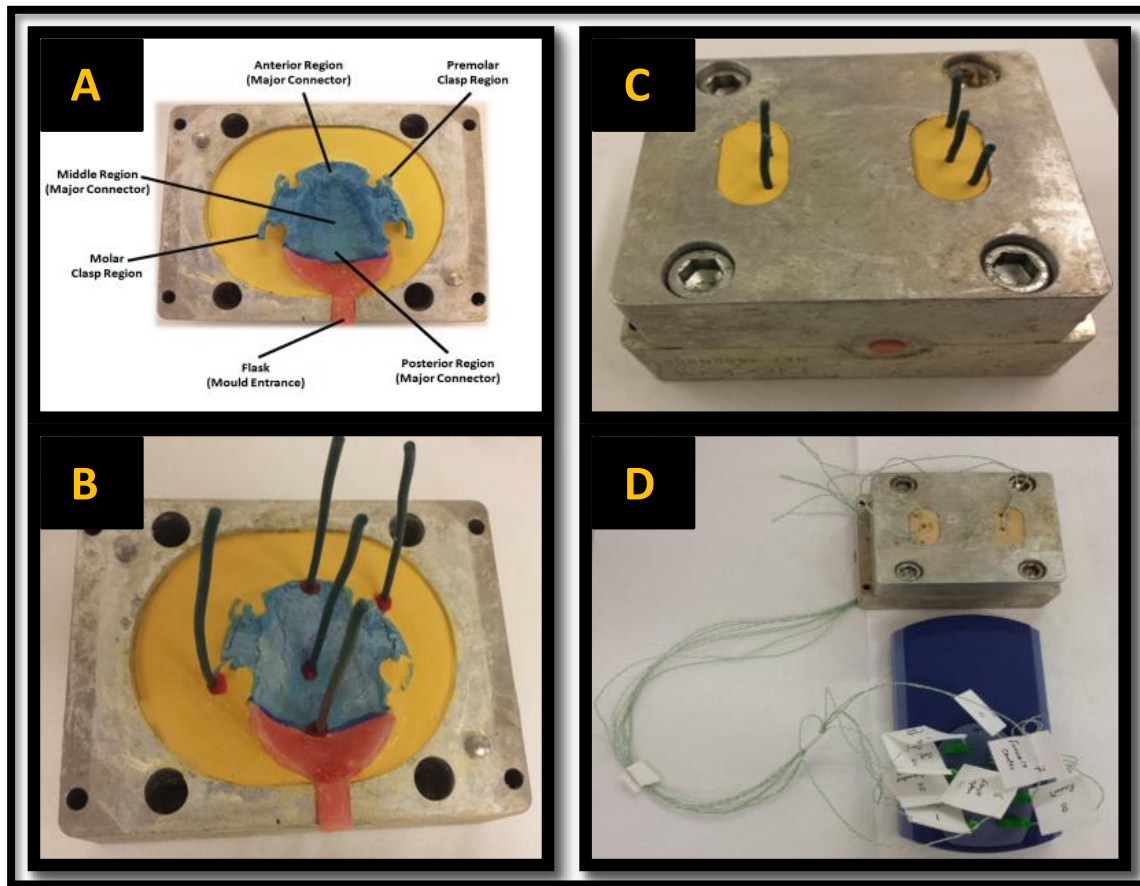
Moulded RPD wax framework showing: A. location of thermocouples inside the mould cavity; B. sprue wax attached to produce the channels; C. sprue wax exposed from the moulded flask; and D. multi-thermocouples inserted through the hollow channels into the mould cavity at different locations
